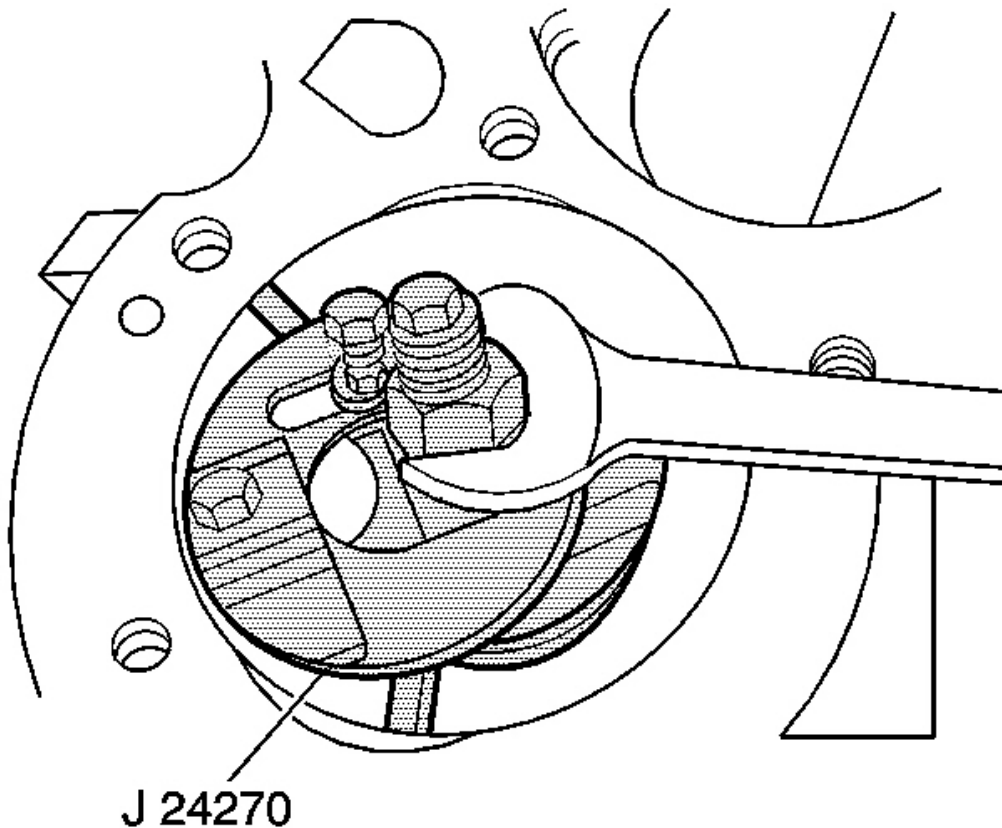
View Of Removal Of Cylinder Bore Ring Ridge
